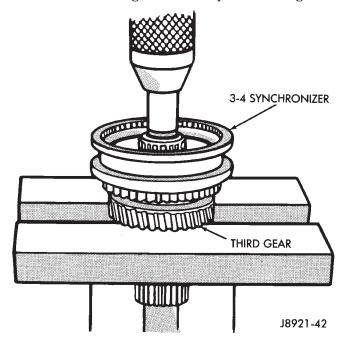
Remove 3-4 Synchronizer And Third Gear
